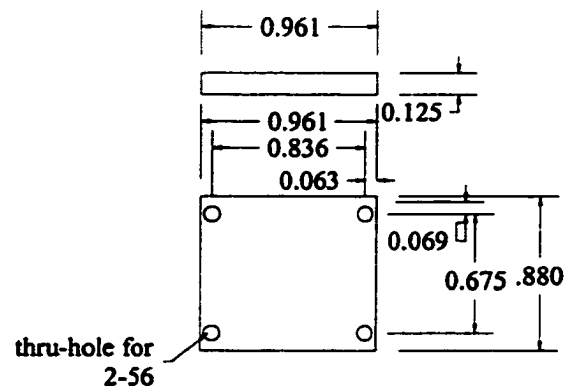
Design drawing for the top plate of the aluminum sample storage garage.
